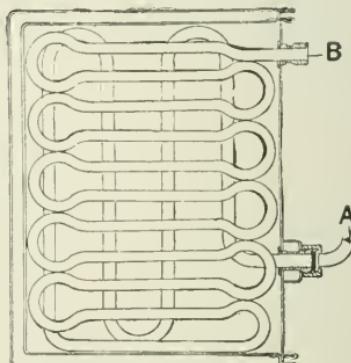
Plan of Serpollet Generator, showing arrangement of coils
